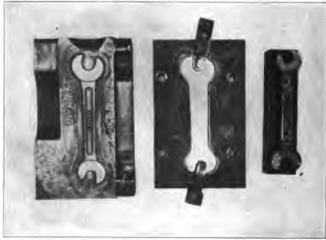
Drop Forging Die for Wrench, and Trimming Die for Same
